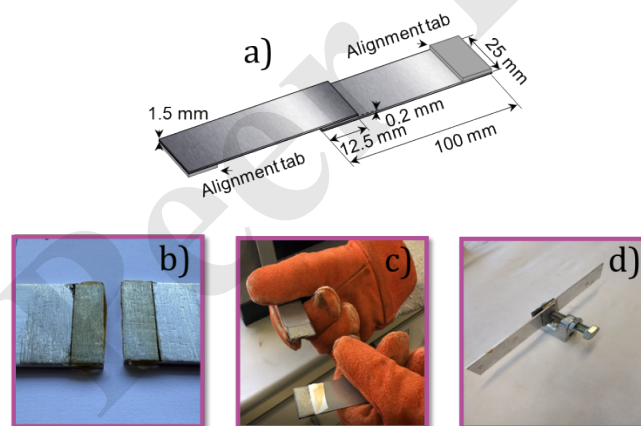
Pictures depicting the adhesion methodologies. a) Scheme of the single lap joint specimens used, b) two aluminum sheets with the adhesive cured on top ready for adhesion after self-welding, c) debonded joint with bare hands and d) re-adhesion set-up.
